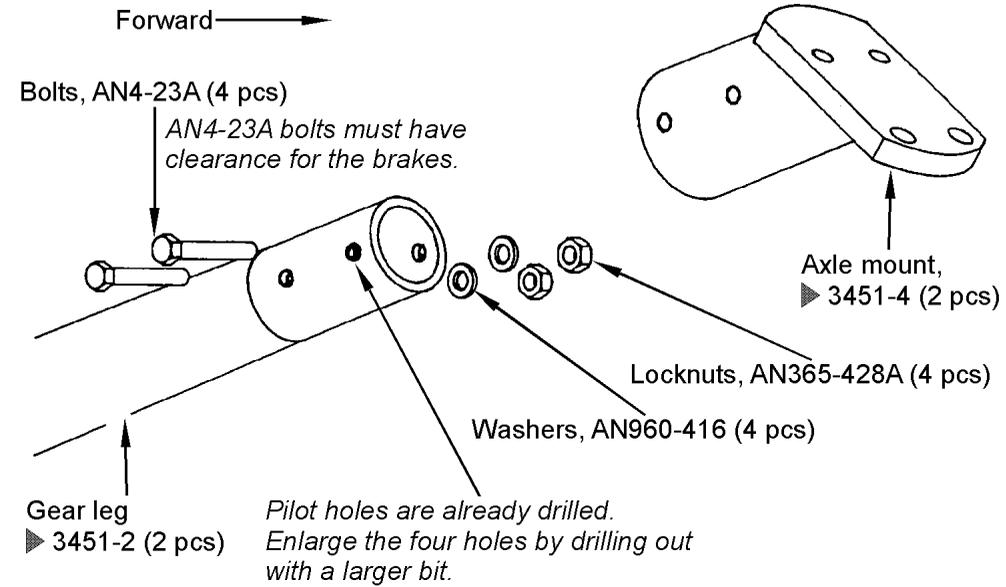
B.6 Attaching the gear leg to the receptacle
